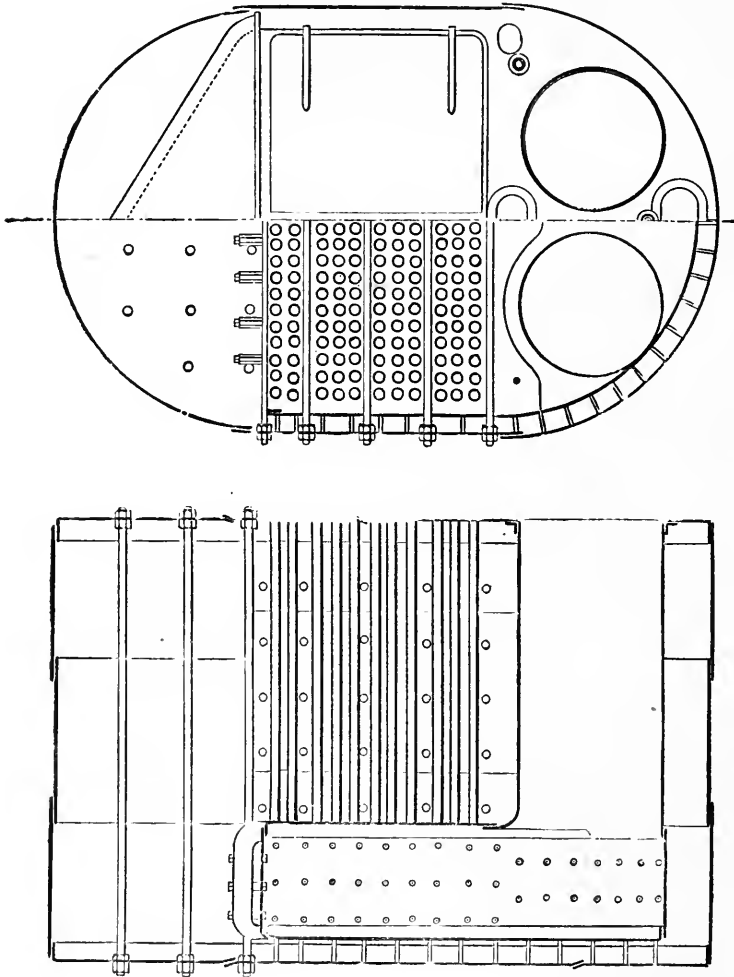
Oval Boiler with Two Furnaces and One Combustion Chamber.
